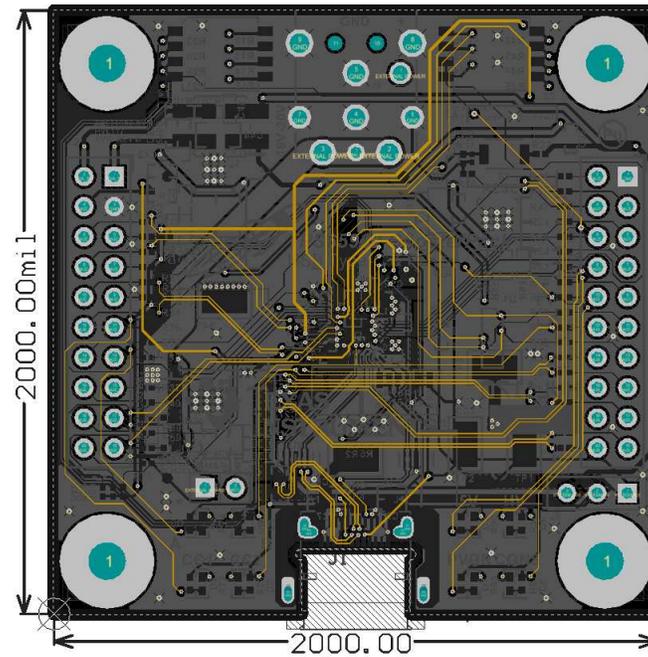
PCB Layer 3 (Inner Signal Layer 1)
